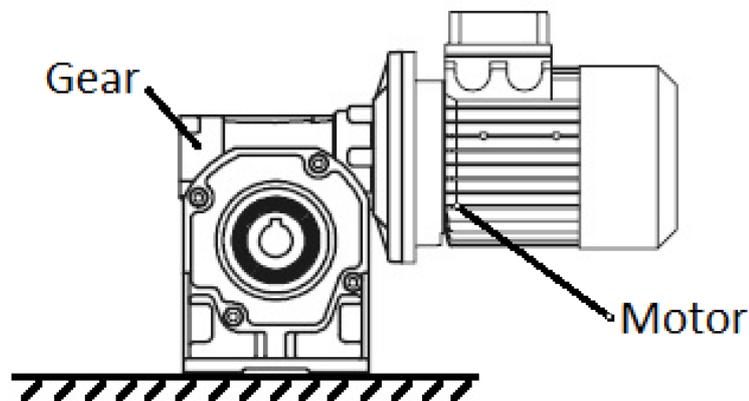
Motor and gear combination (Mod. Motovario S.p.A. 2013, p. 1).
